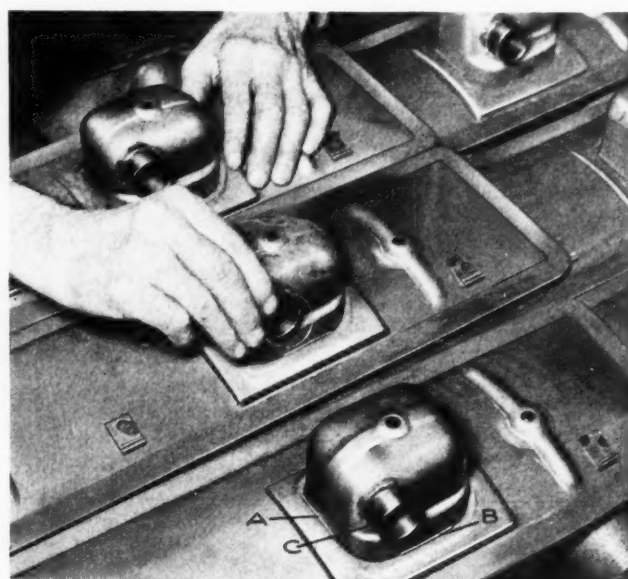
Straight and Coiled Pieces of Wire are Placed Along Surfaces to be Brazed; They Melt in the Furnace, Flow into the Joints, and Then Solidify
